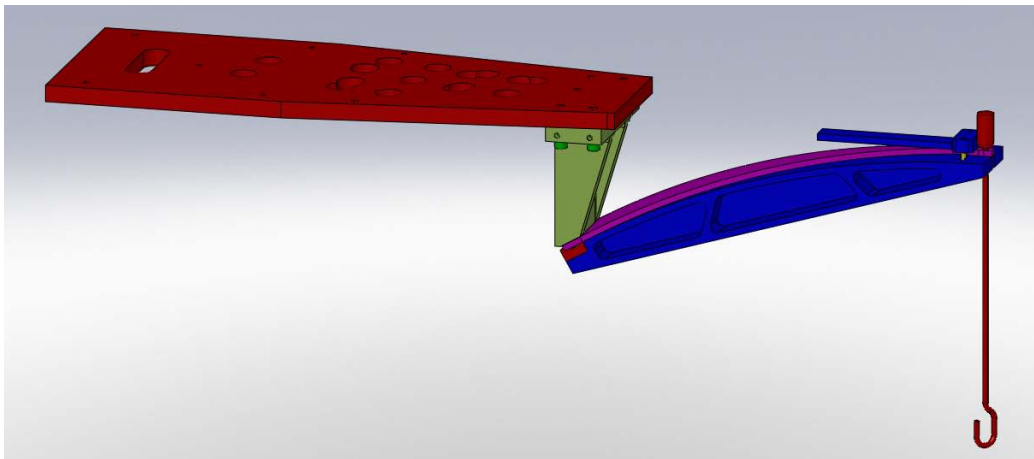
D1001005: ACB Blade Assy in Bending Configuration
